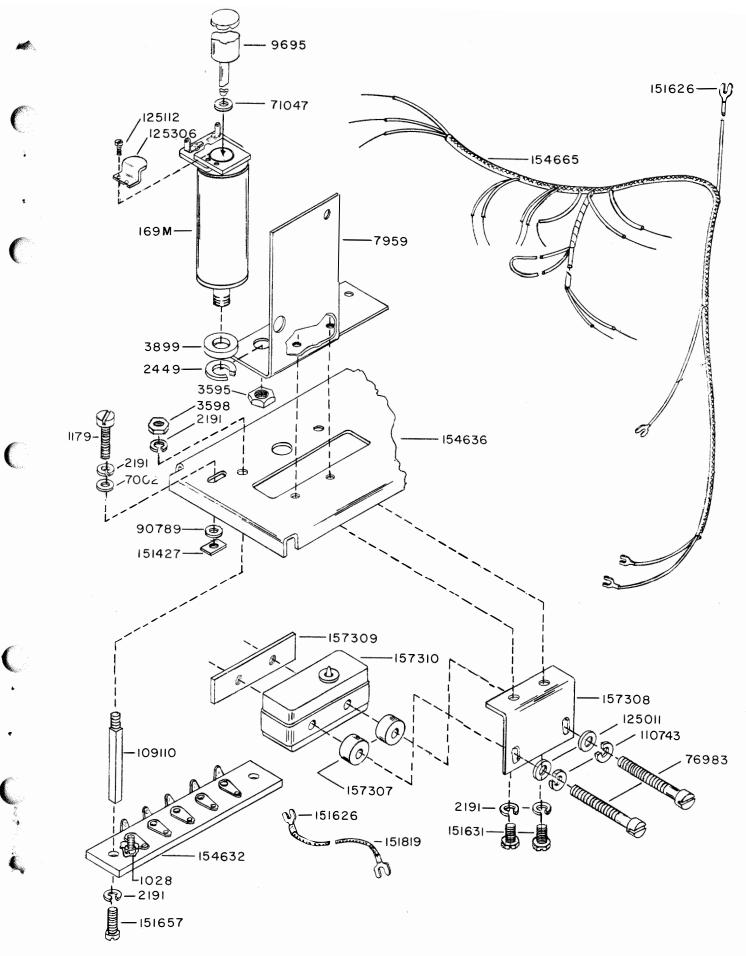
152332 RELAY MOTOR CONTROL ASSEMBLY
